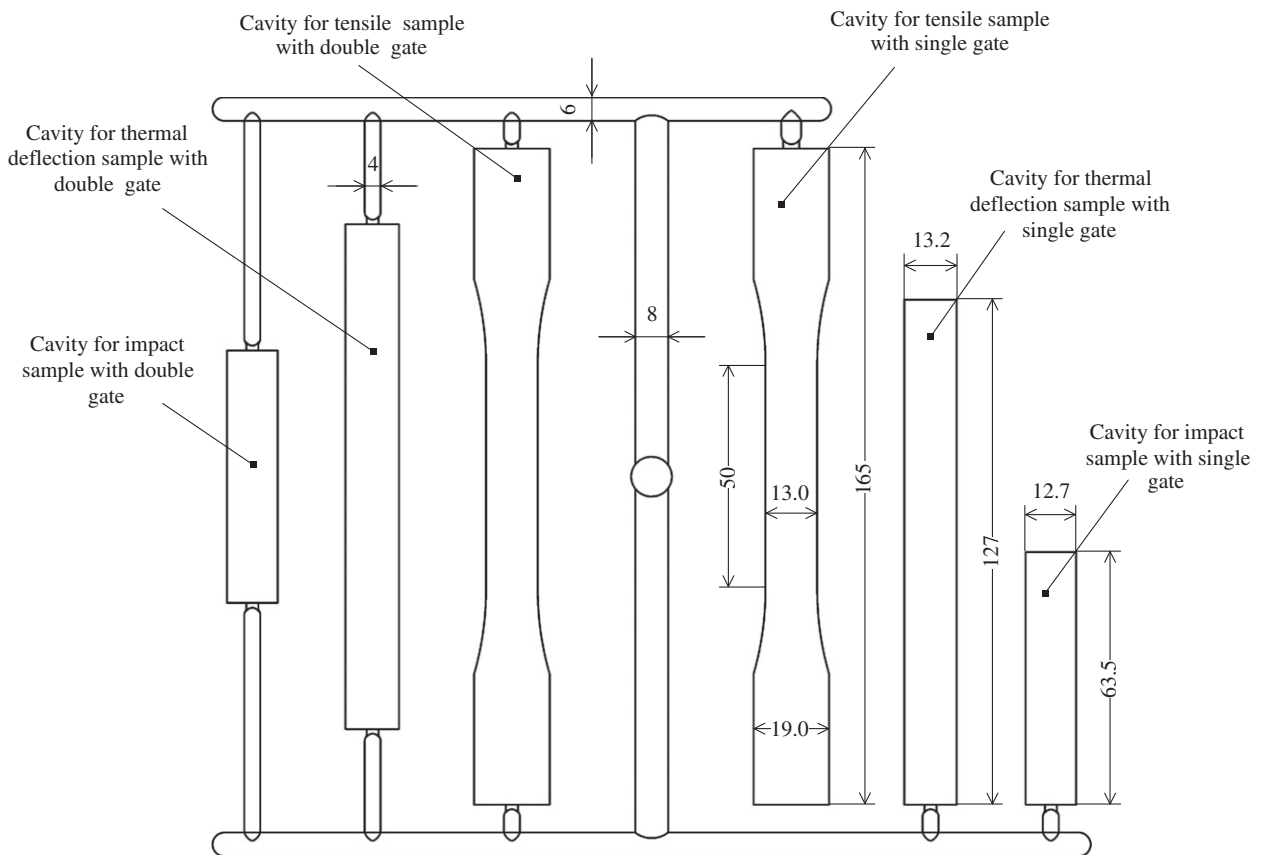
Layout and dimensions of the electric heating RHCM mould cavities.
